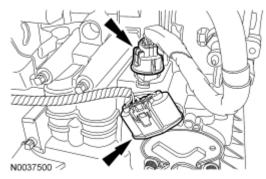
Locating Engine Wiring Harness Bracket And Nut Courtesy of FORD MOTOR CO.
